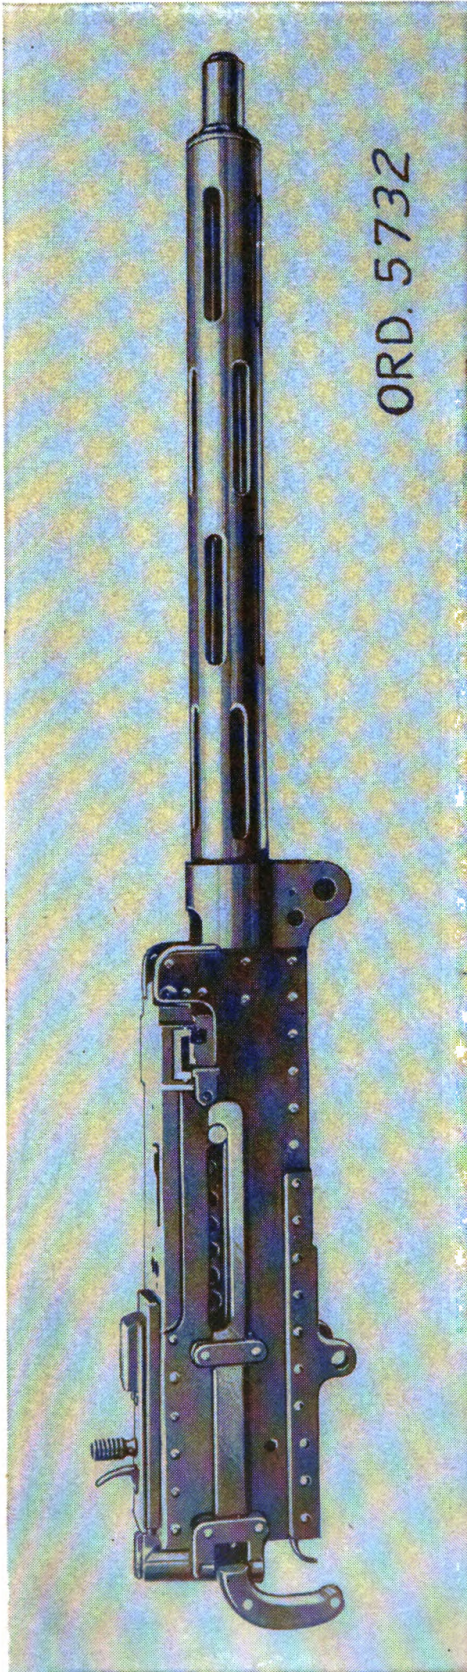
Browning aircraft machine gun, caliber .30, M1919—fixed—right side view.
